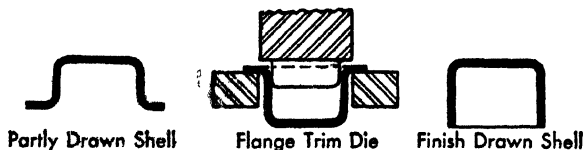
Flange and finish draw. Satisfactory for most shells. One additional die for trimming required.
